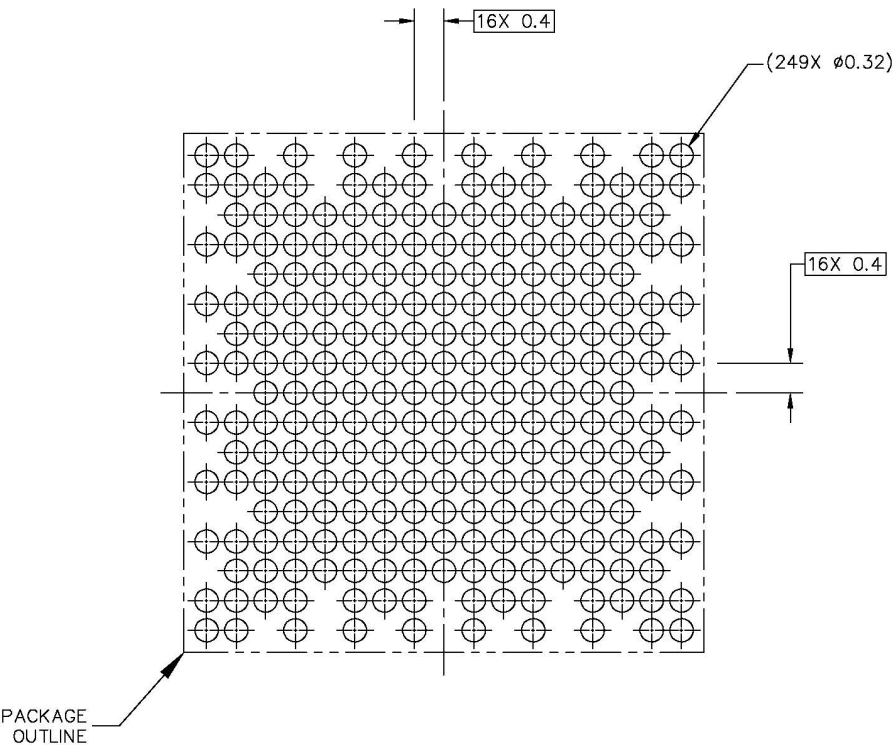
Reflow soldering of the VFBGA176 package (part 3 of 3)
